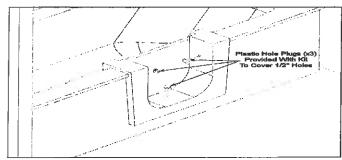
Inserting Hole Plugs To Cover Screw Holes
